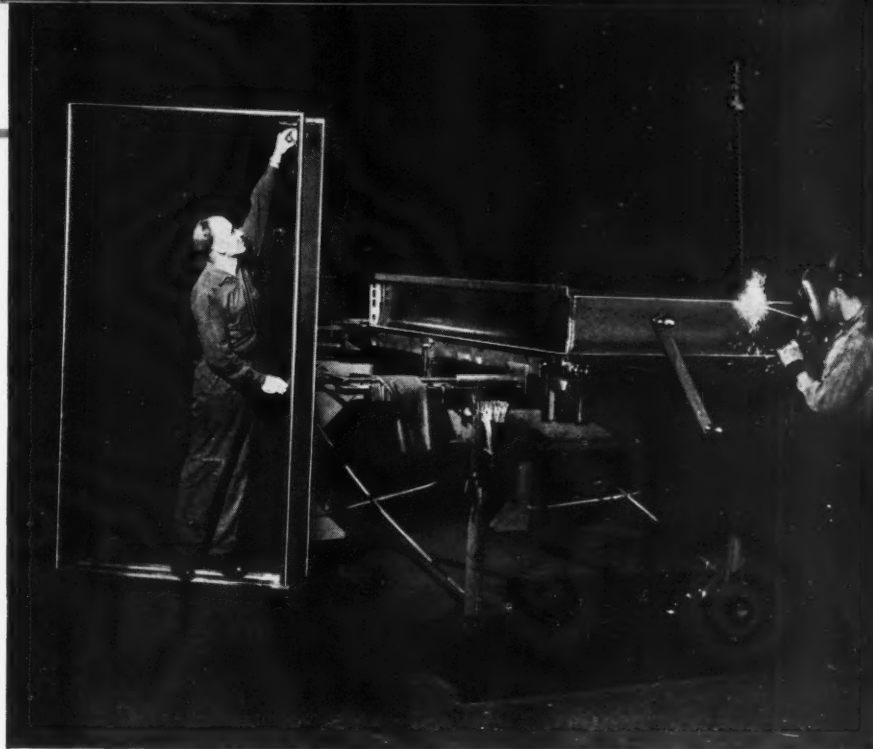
Special fixtures, designed to suit assemblies of various types, are used in arc-welding door jamb sections
